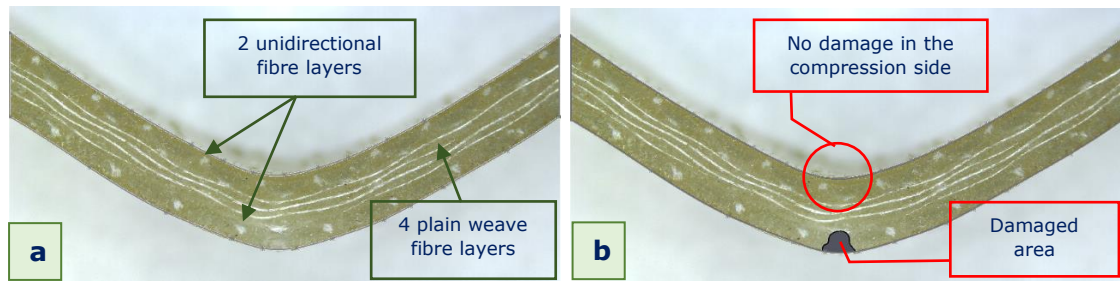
Visible damage analysis of SP-10 with a reinforcement refinement; (a) deformed shape and (b) area of damage
